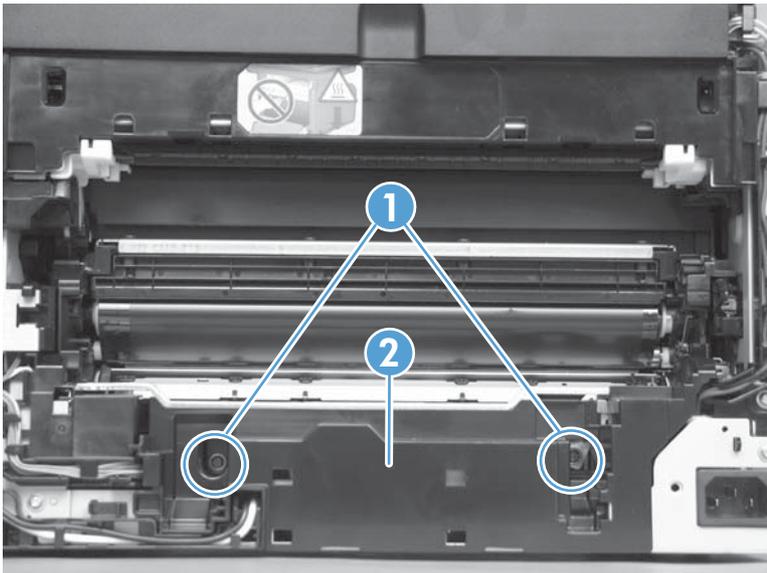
Remove the power supply (fuser; 5 of 5)
